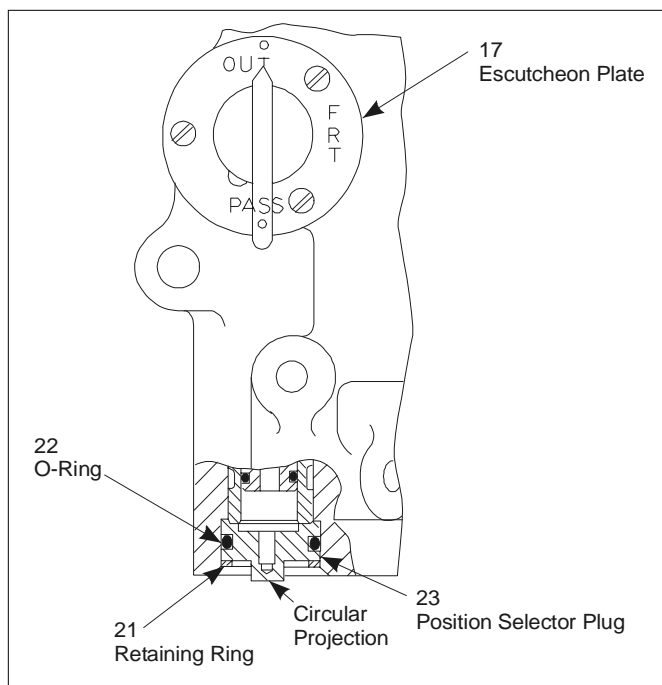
Escutcheon Plate & Position Selector Plug Orientation Drawing
